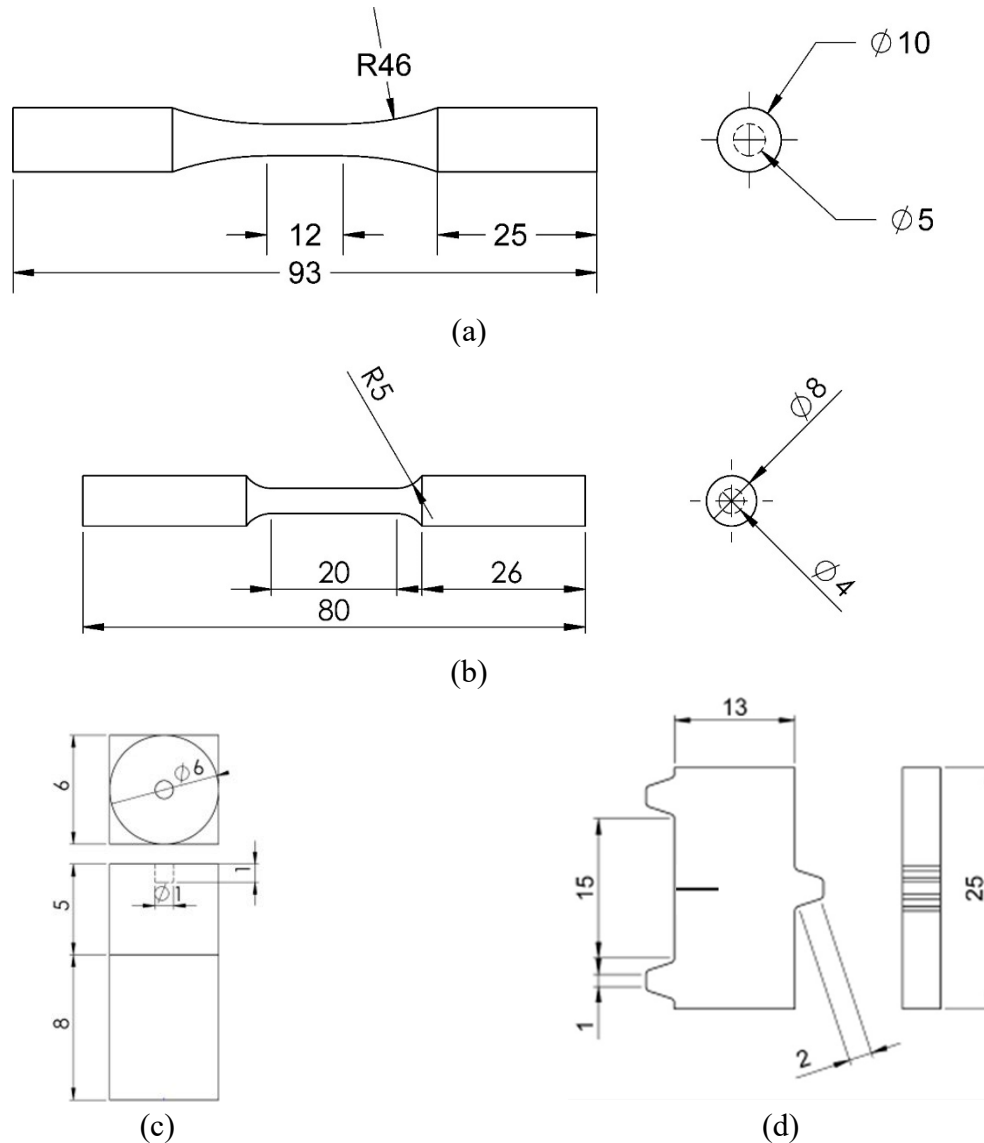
The geometries of (a) round fatigue specimens with 5-mm straight gage diameter according to ASTM E466 [52], (b) round tension test specimen with 4-mm straight gauge diameter according to ASTM E8M [53], (c) XCT coupon, and (d) high strain-rate fracture specimen. All dimensions are in mm.
